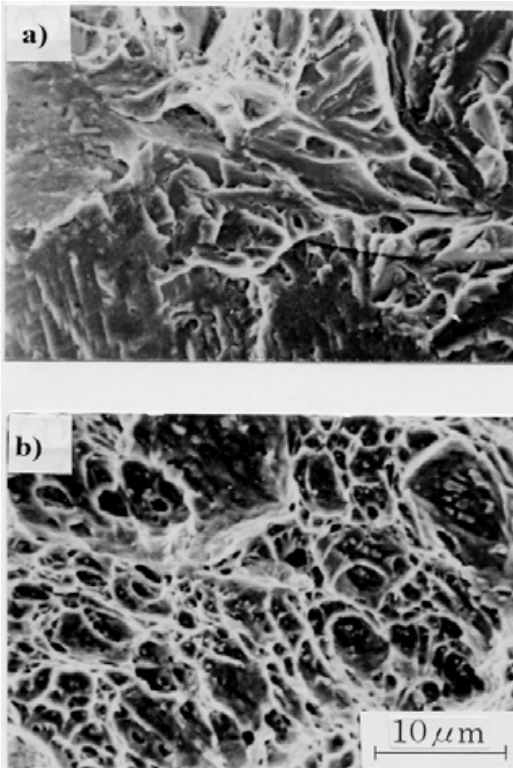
Impact fracture surface, SKD62[4]. a) RT b) 673K
